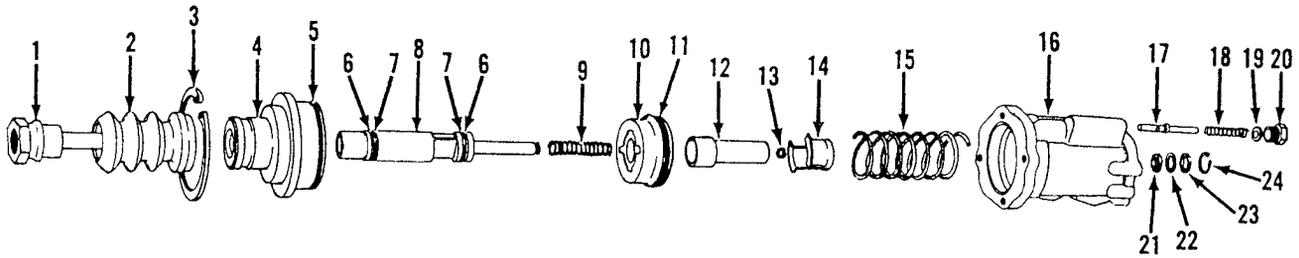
EXPLODED VIEW OF POWER CYLINDER
